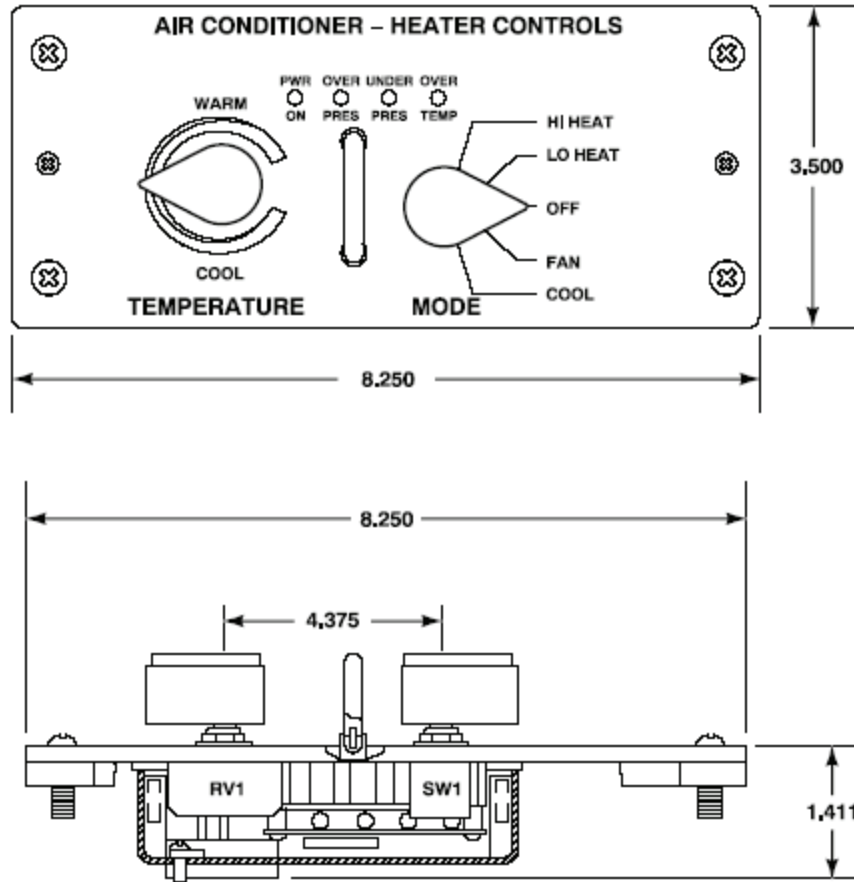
REMOTE CONTROL UNIT INSTALLATION DIMENSIONS.
